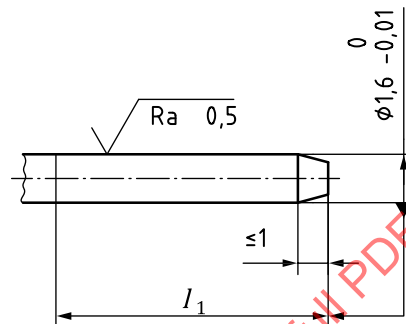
Dimensions, tolerances and surface roughness for Type 3 shank
